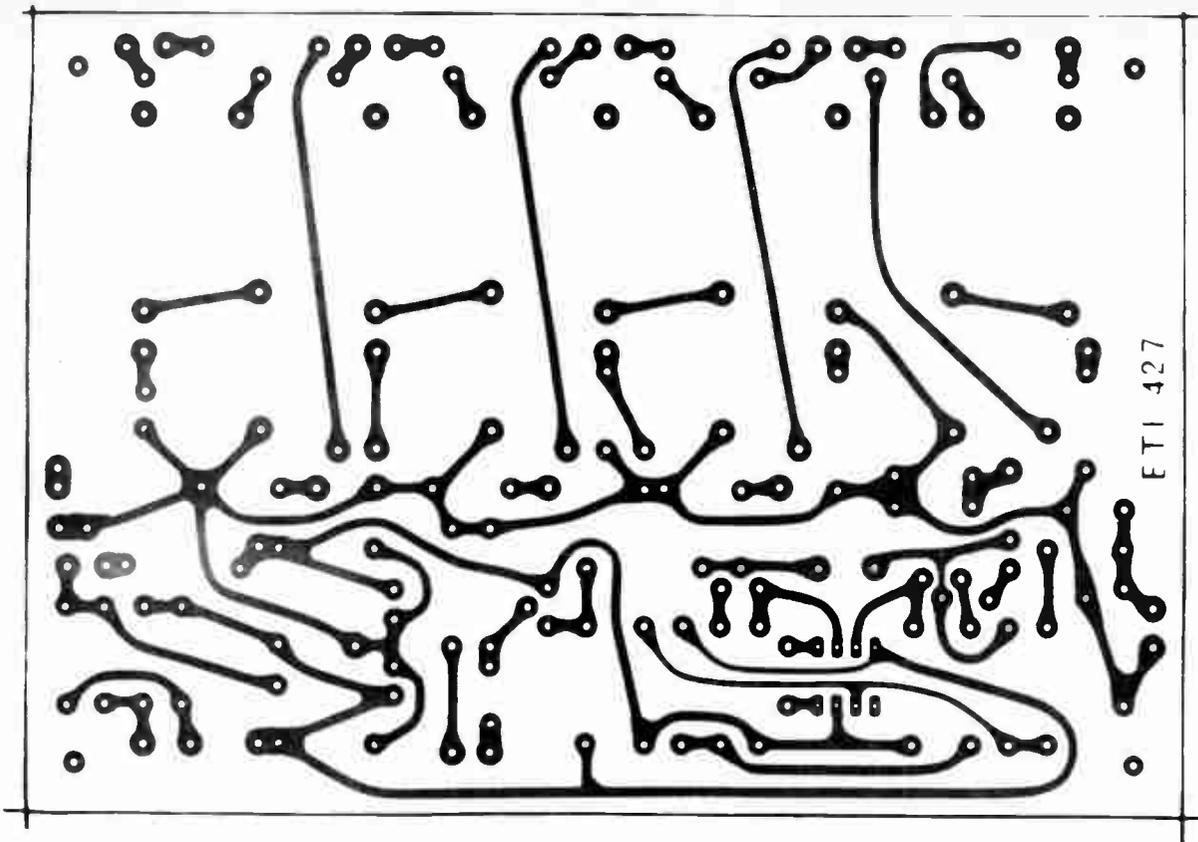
Printed circuit board for the equalizer. Full size 152 x 103 mm.
